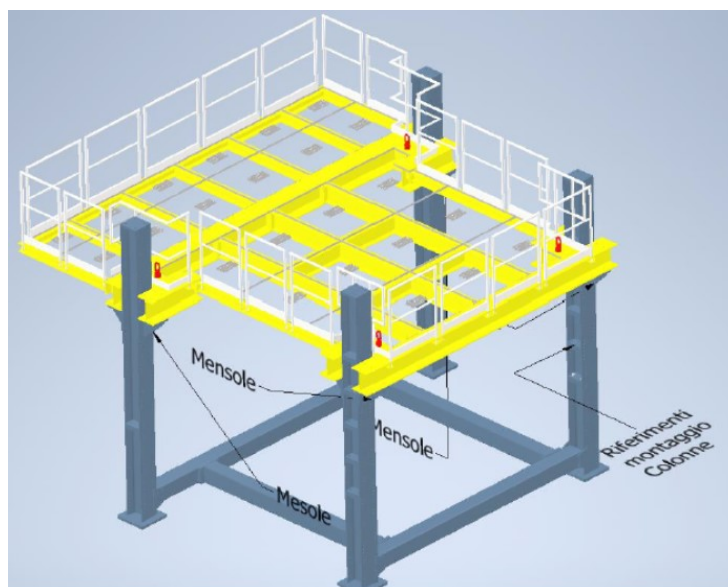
Drawing of platform used to position the extraction tool in front of the calorimeter.
